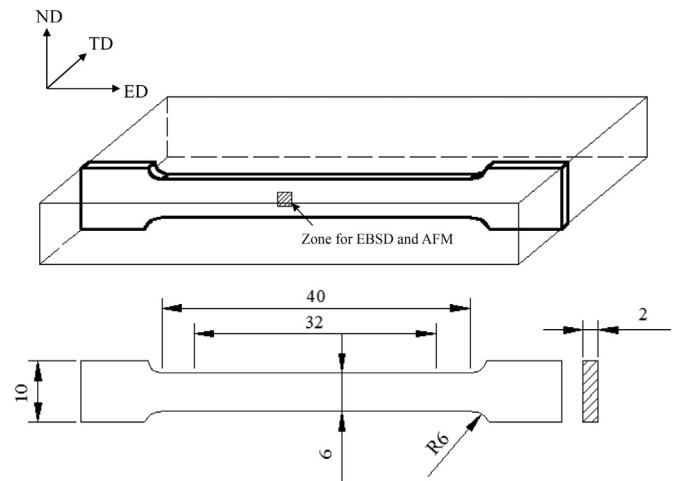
Schematic illustration of the tensile specimen sampling position, actual inspection plane for SEM-EBSD and AFM analysis and dimensions of the tensile test sample [mm].
